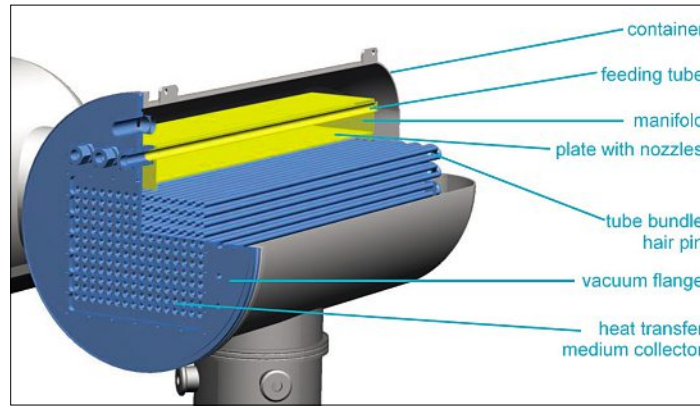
CAD cross-sectional view of the E/C unit (manifold and tube bundle).
